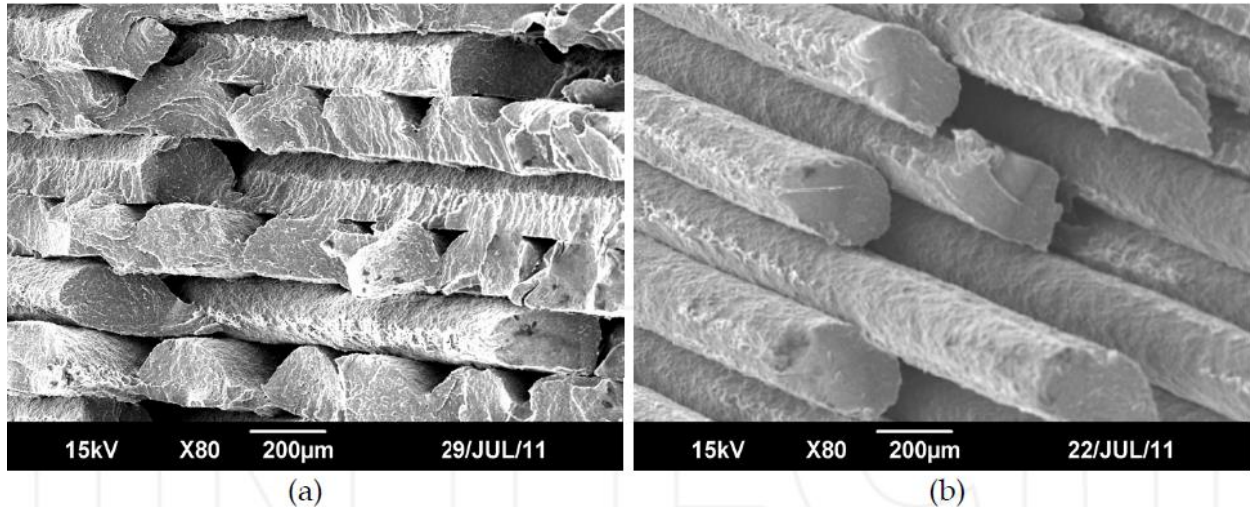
13 Fracture surface a) Alternating 45/-45 degree b) Diagonal 45 degree [36]
